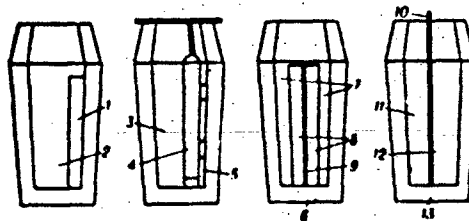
Typical arrangements for casting laminated ingot: 1) soft steel plate; 2) filler of hard steel (hard layer); 3) filler of hard steel; 4) soft steel plate; 5) layer to improve thermal regime (removed later); 6) double casting of two two-layer ingots; 7) filler of hard steel (hard layer); 8) soft steel plate; 9) ceramic interlayer preventing welding of ingots; 10) soft sheet-steel barrier; 11) pouring of first layer; 12) pouring of second layer; 13) sequential layer-by-layer casting.
